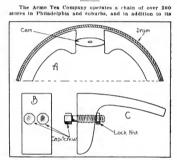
Some Brake Hints: A, Expanding Type, the Cam and Faces of Which Are Worn; B, Repair Made with Cap Serewa; C, Mrthod of Adjusting and Locking.
